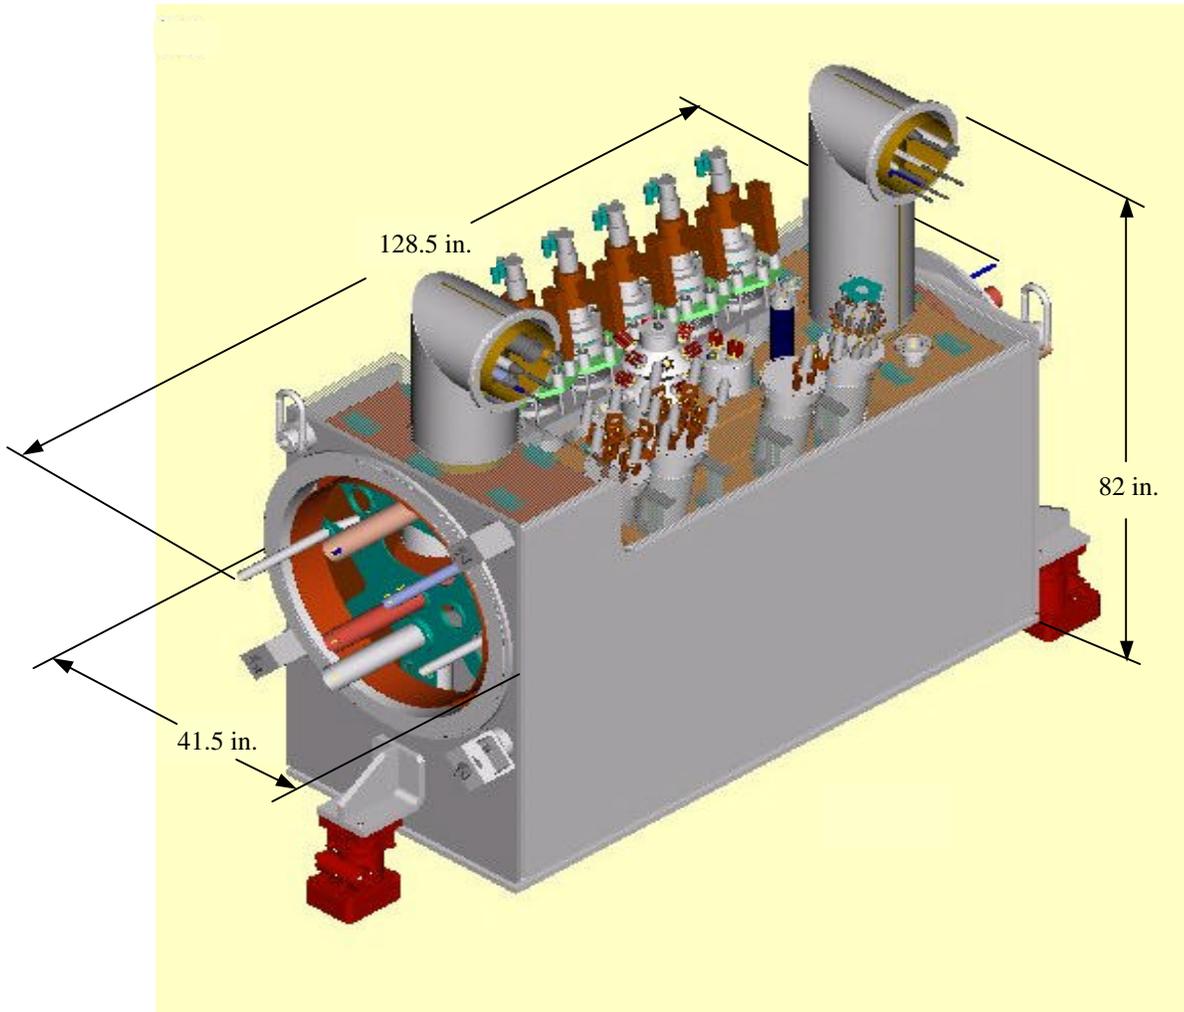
Illustration of the DFBX Assembly Showing Maximum Dimensions (jacks not included)
